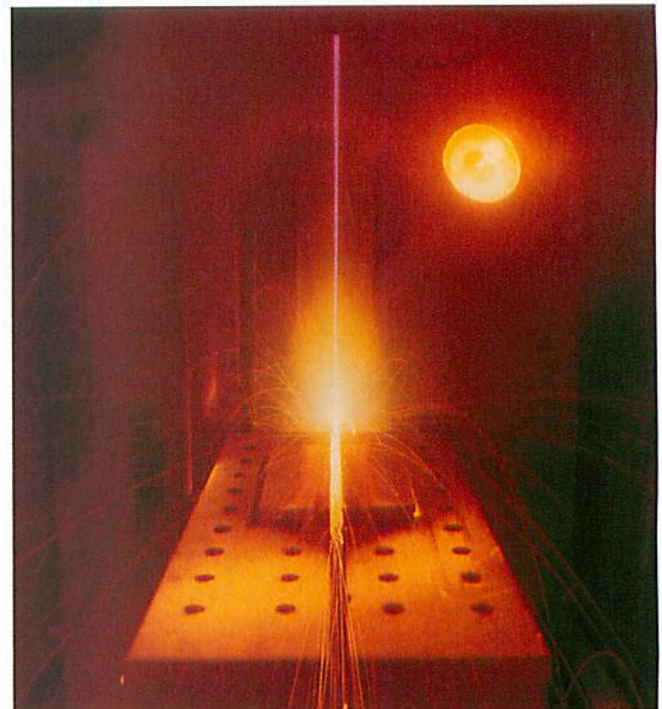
An electron beam welder uses a concentrated beam of electrons. The welding is done inside a vacuum chamber. (United Technologies)
